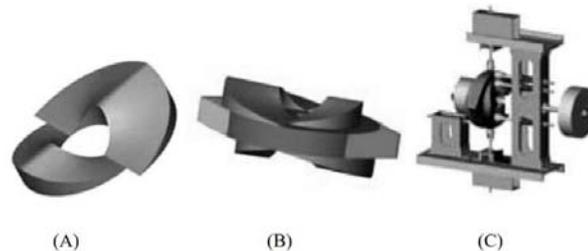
Experimental setup (A) bending cams (B) Torsion cams (C) cams-disc and flywheel work mechanism [20].
